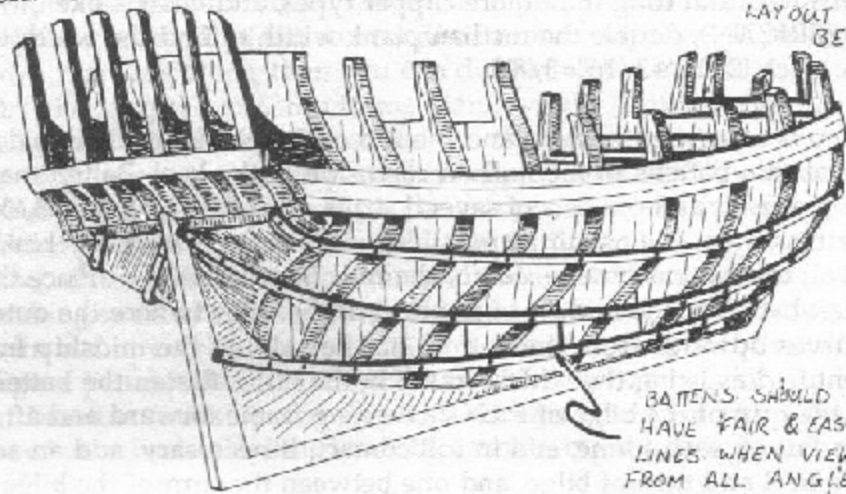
24. Using beams to assist you in your planking. (Drawing courtesy of Frederic Monfils.)
